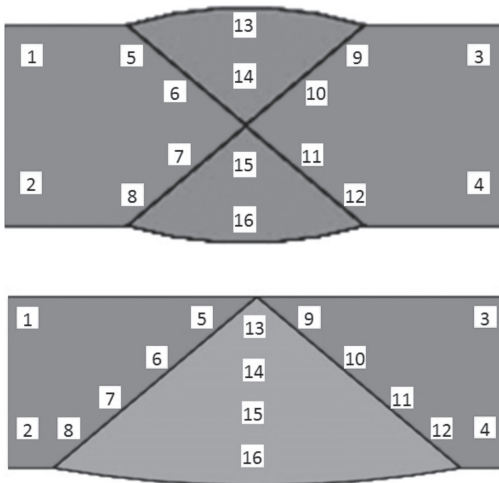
Hardness measurement test points for X and V in the welding groove
